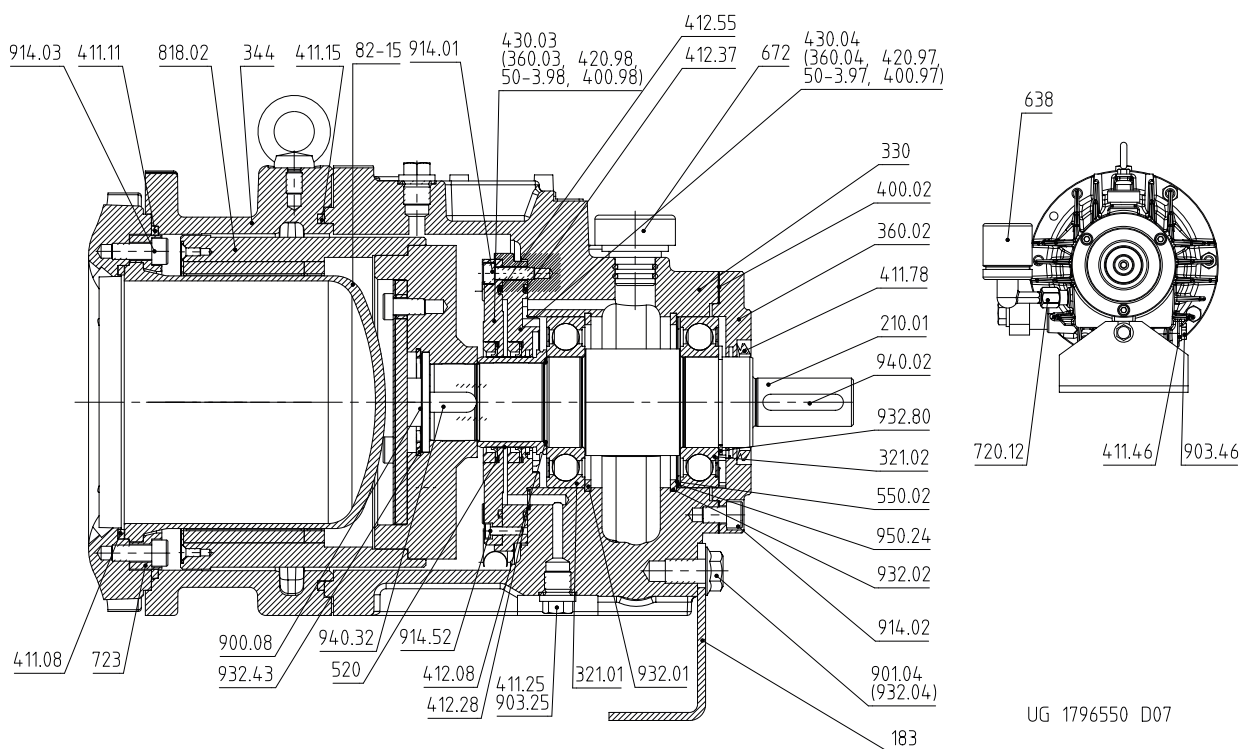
Model with bearing bracket with oil lubrication and double shaft seal ring as leakage barrier
